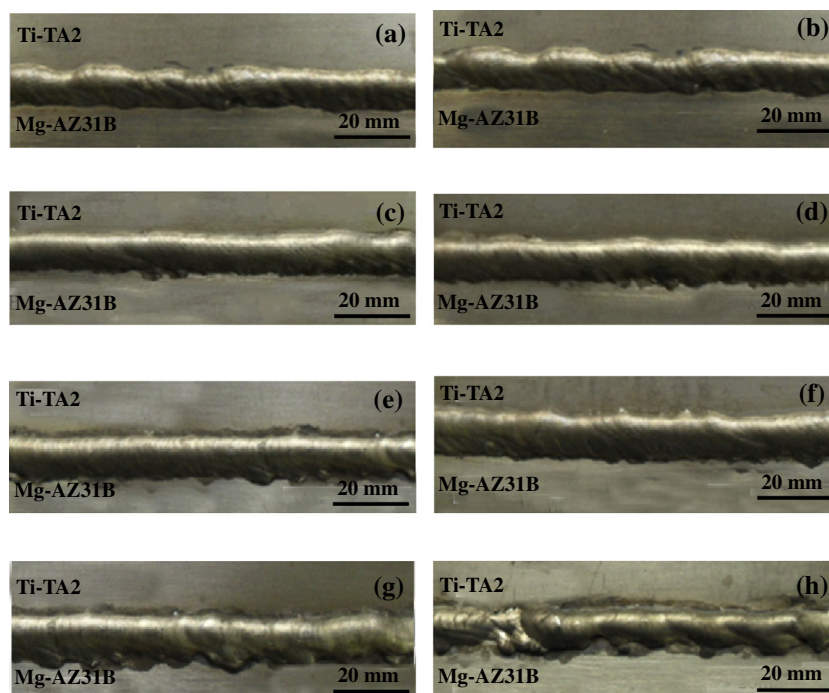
Effects of welding voltage on weld appearance of Ti–Mg joint (top Ti sheet–bottom Mg sheet): (a) welding voltage of 10 V, (b) welding voltage of 11 V, (c) welding voltage of 12 V, (d) welding voltage of 13 V, (e) welding voltage of 14 V, (f) welding voltage of 15 V, (g) welding voltage of 17 V, and (h) welding voltage of 19 V.
